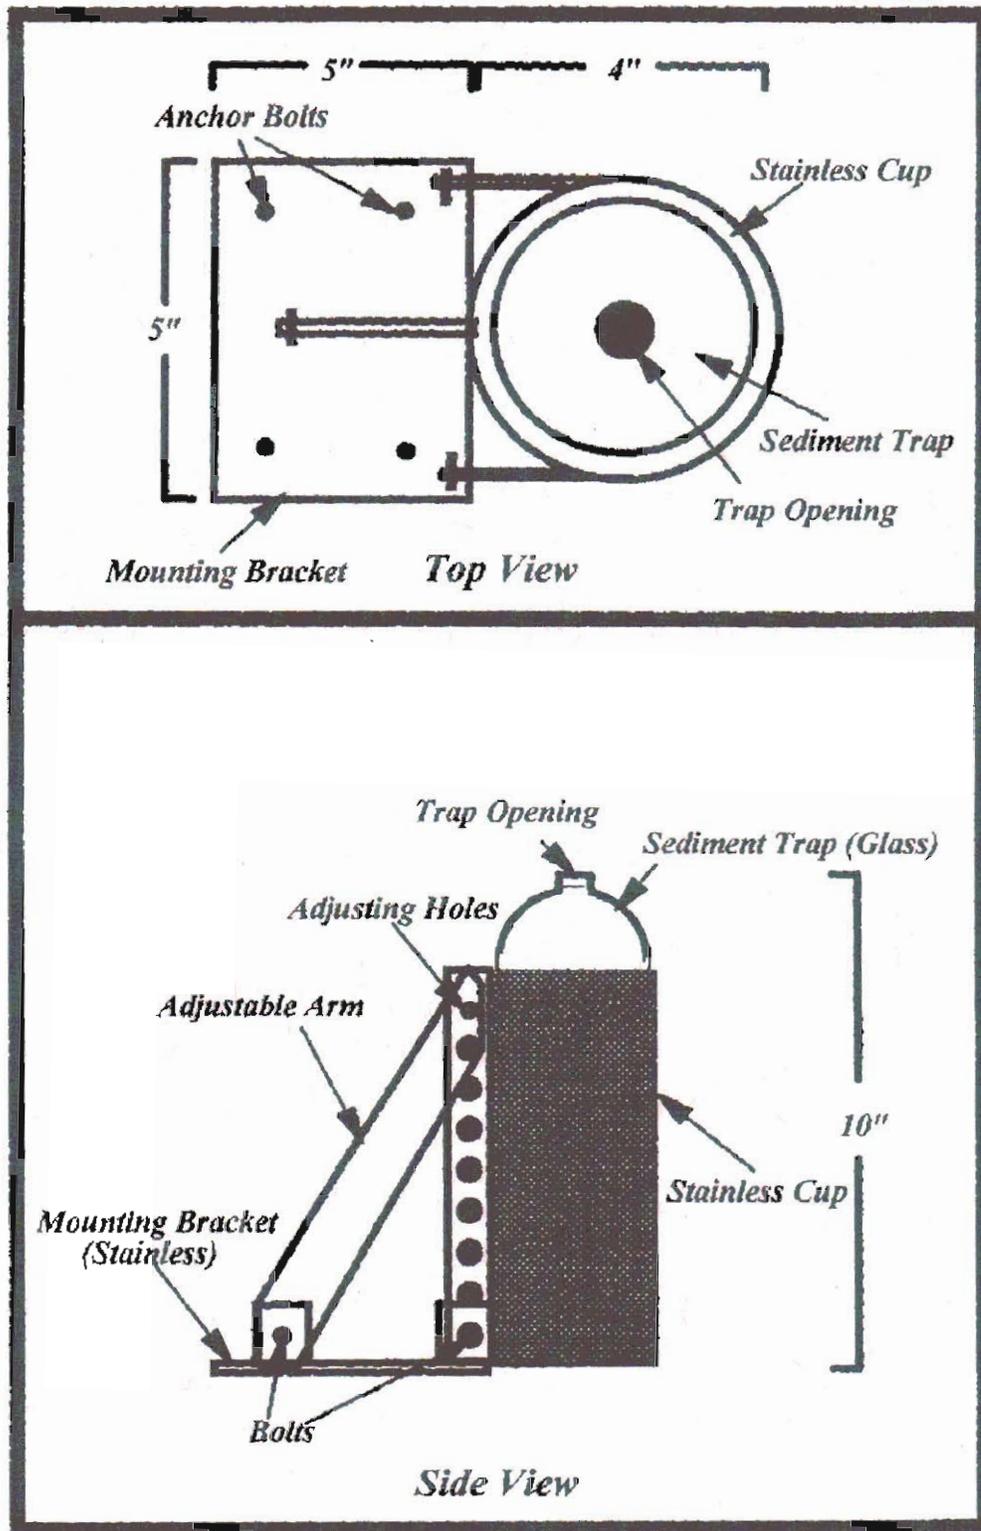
Construction details of typical stormwater sediment trap (Adapted from Norton, 1998)
